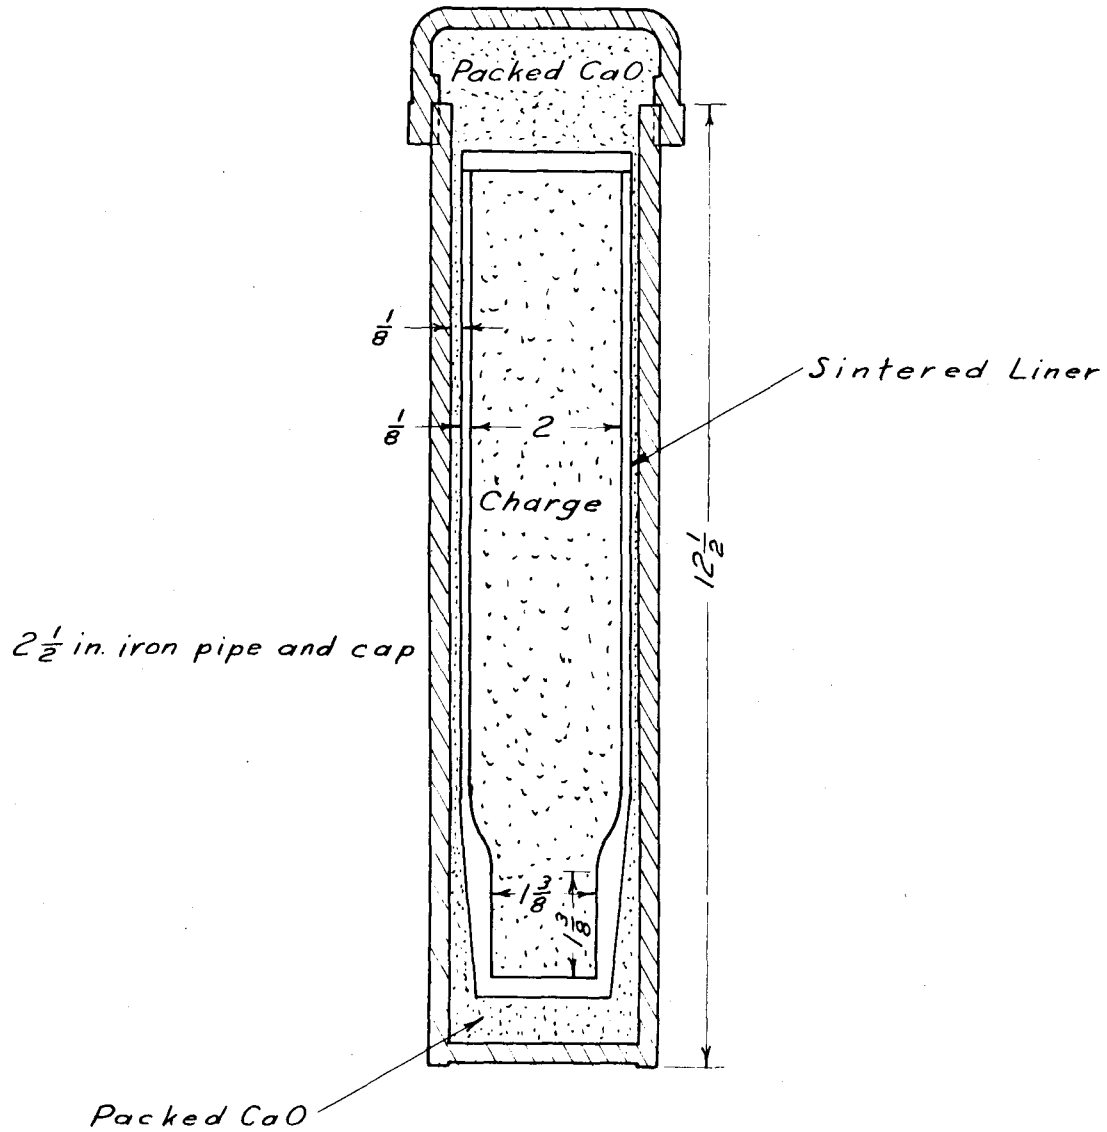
Cross Sectional View of Bomb with a Sintered Lime Liner.
